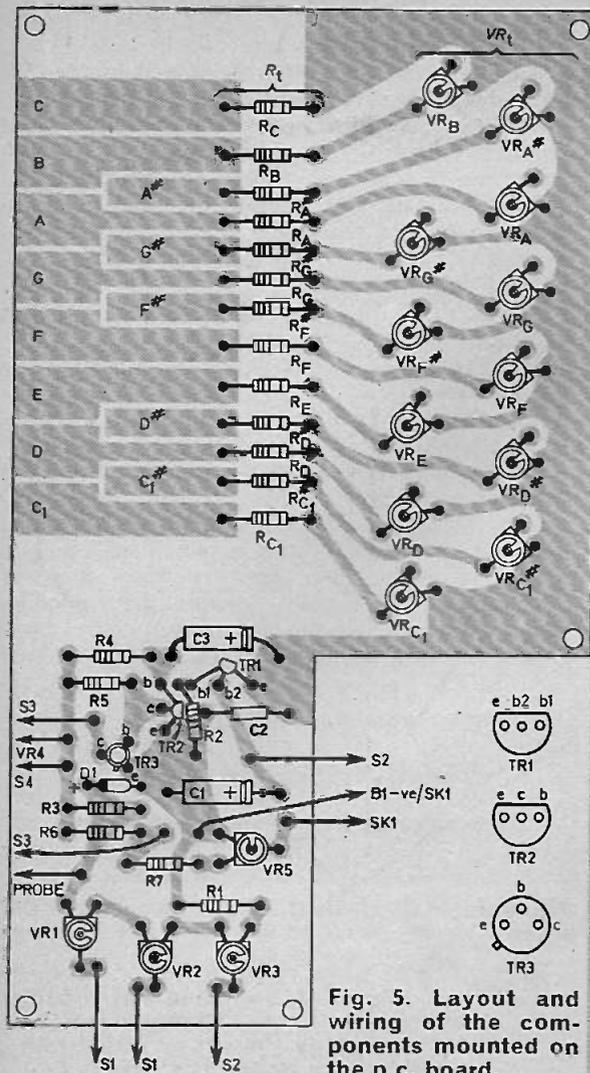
Layout and wiring of the components mounted on the p.c. board.
